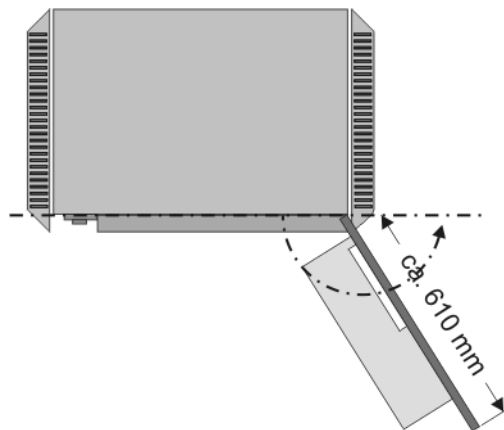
Minimum clearances with top-mounted / technology cabinet
